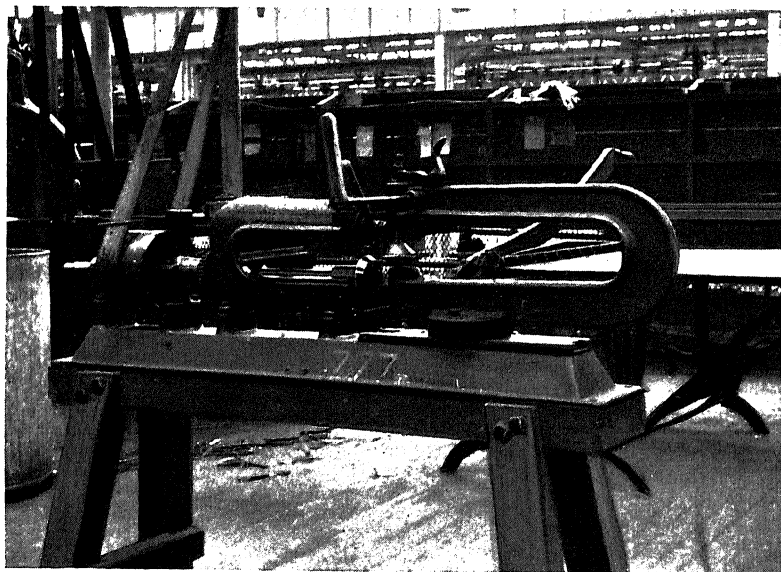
Circular Shears for cutting Disc-shaped Pieces of Paper, Cloth, and Fibrous Materials in general.
